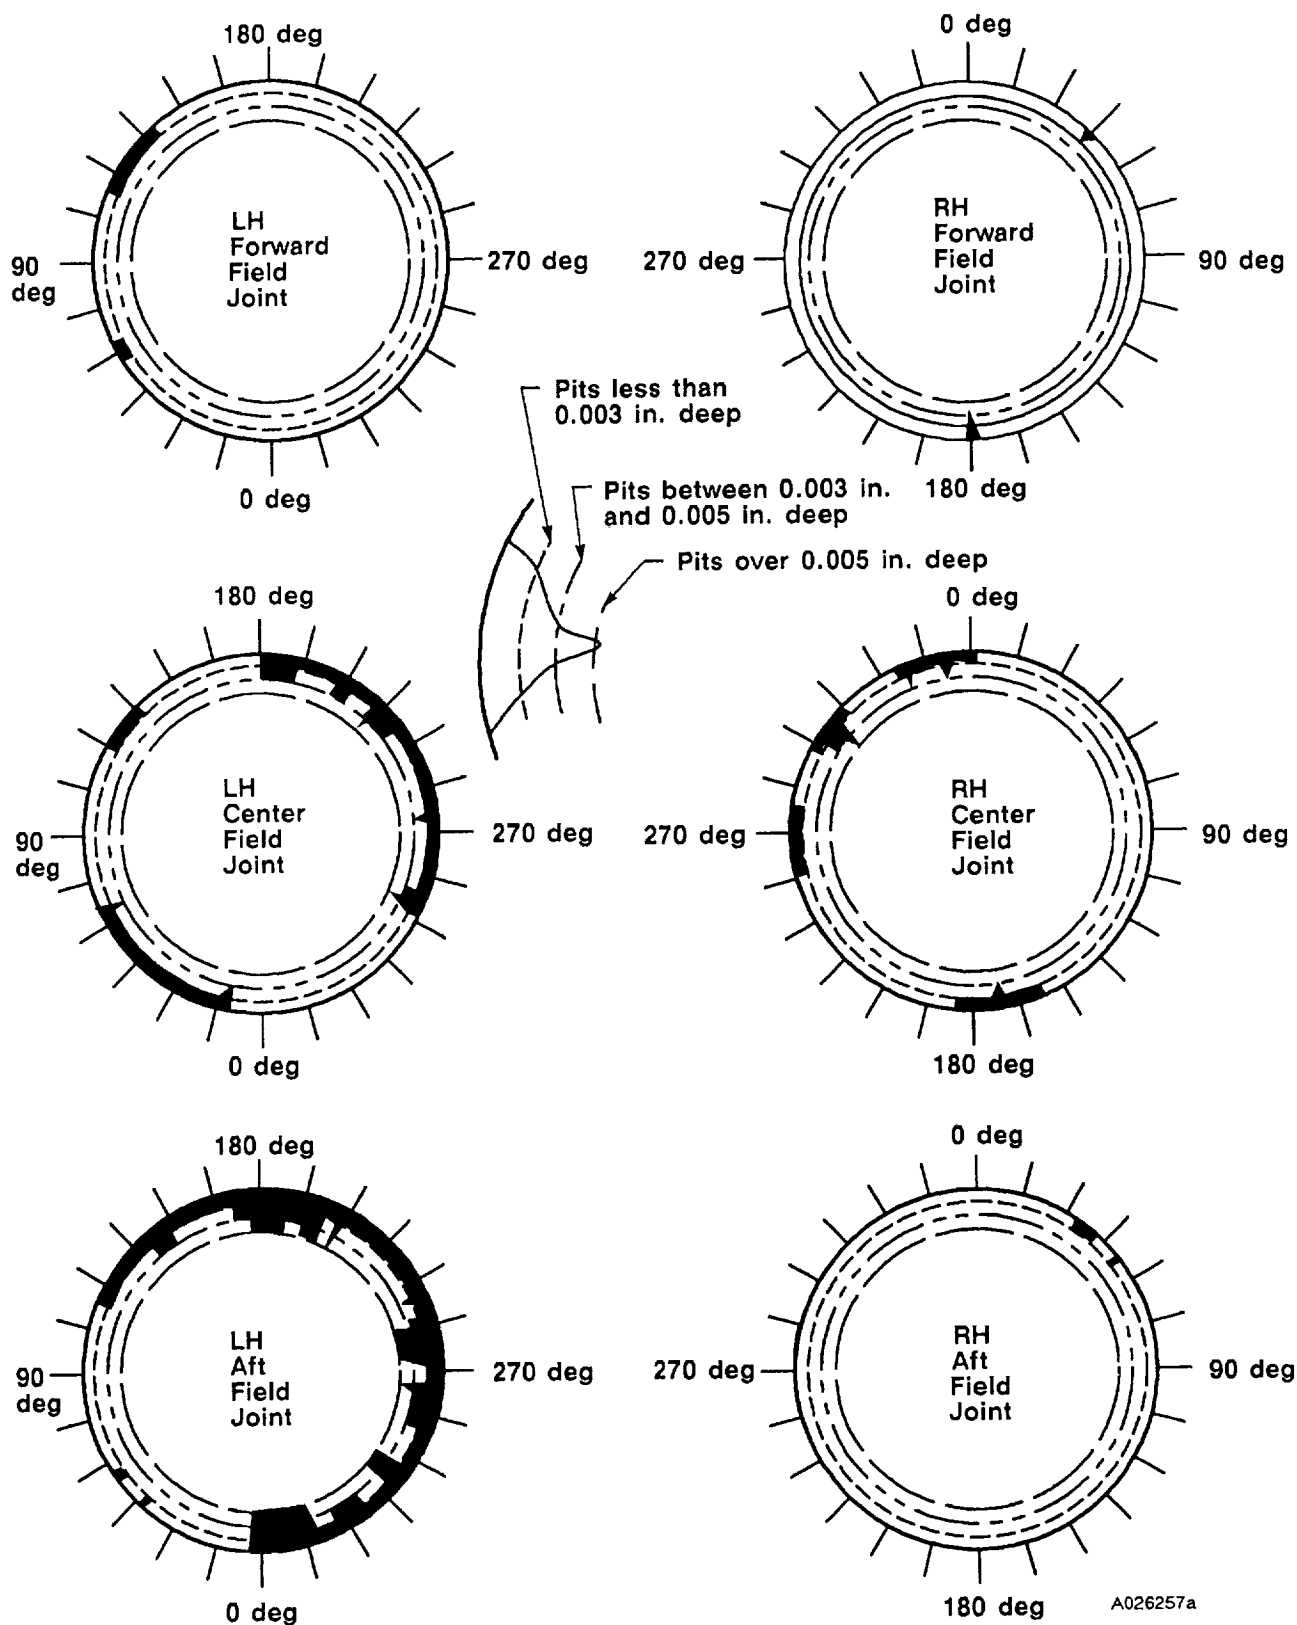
Flight Motor Set 360L009 Field Joint Fretting
